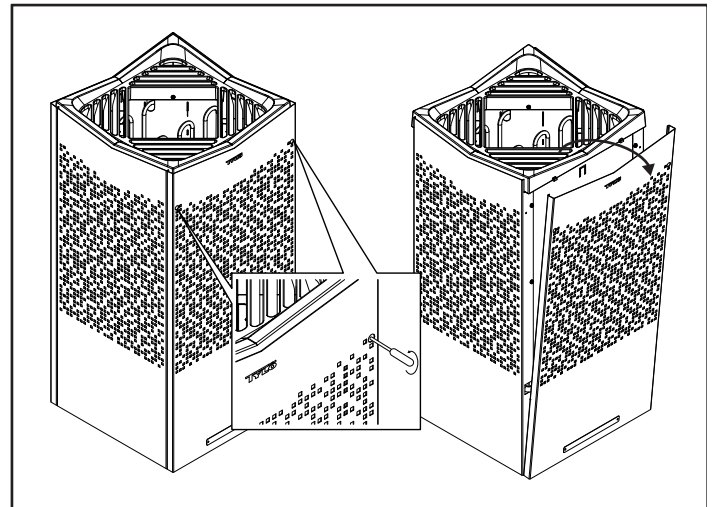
Unscrew the hidden screws, torx 20, take off the front
